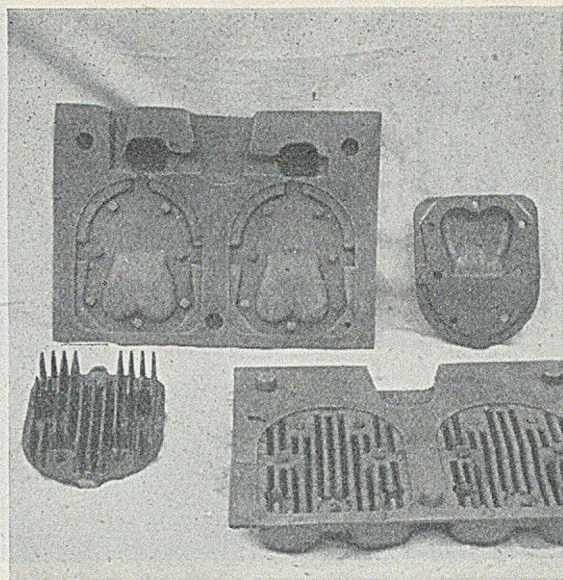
Shells and Castings for an Air-cooled Cylinder Head, on which All Machining was eliminated, save for tapping the Plug Hole.
